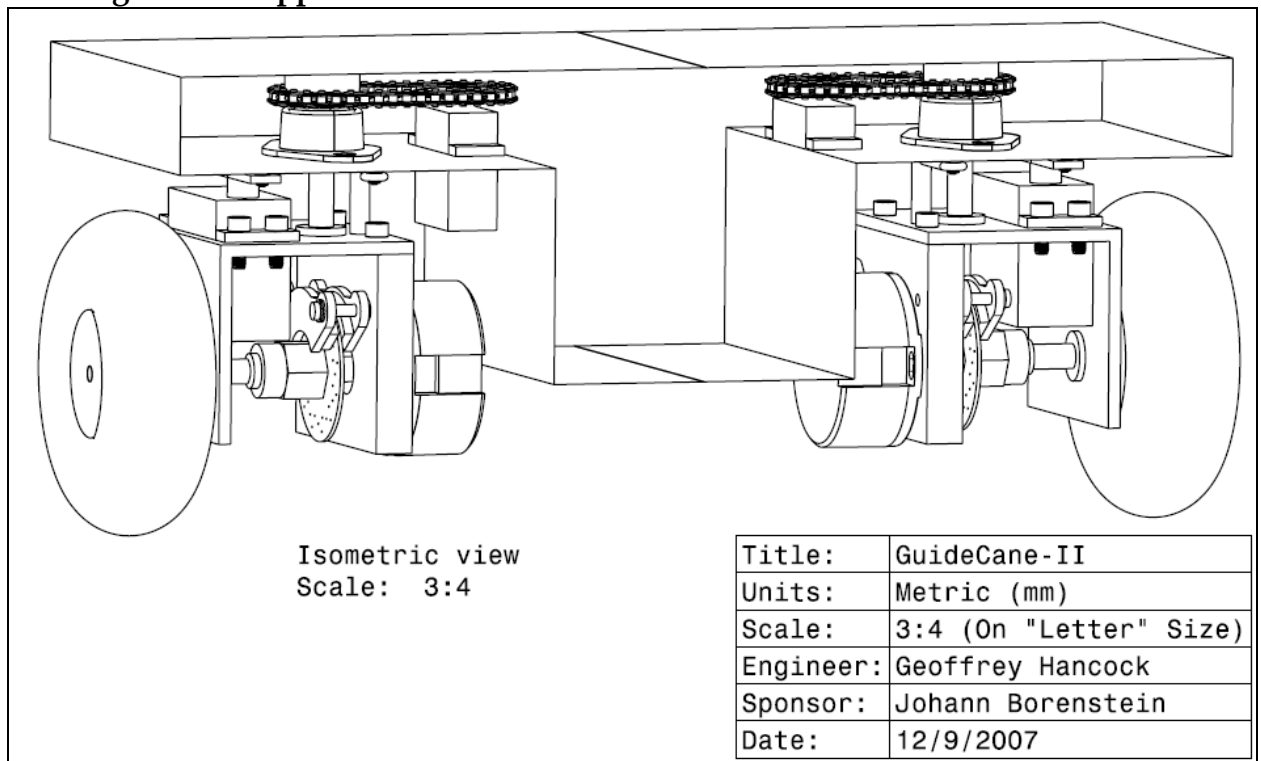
Braking subassembly design drawing with all dimensions in mm. For scaled drawing refer to Appendix H.
